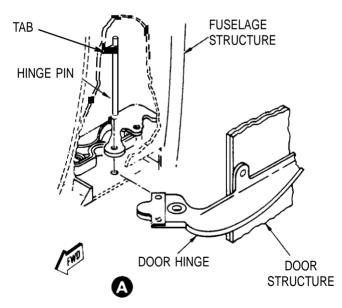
Pilot and Passenger/Cargo Door Removal
